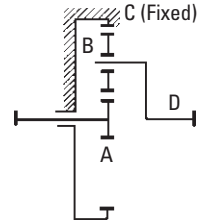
(a) Planetary Type Planetary Gear Mechanism
